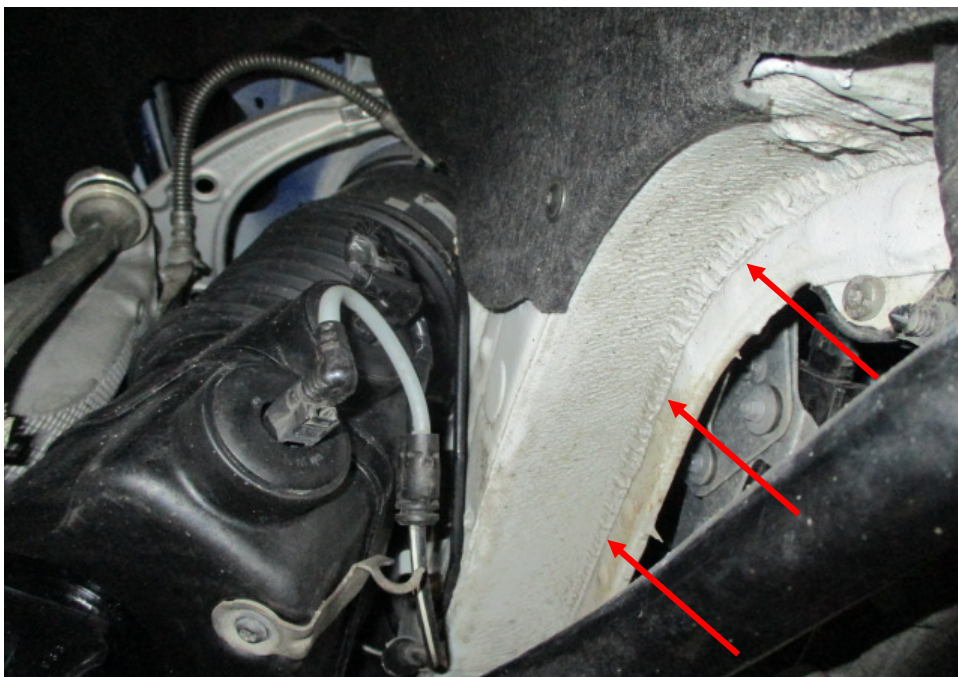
shows the chassis/structural body at the underside front left of the Motor Car. I did not find any weld marks other than original spot weld marks on the chassis/structural body of the Motor Car. The original factory sealant (arrowed) at the joints along the chassis/structural body was untouched, indicating no work was done on the chassis/structural body of the Motor Car and that the chassis/structural body was originally fitted.
